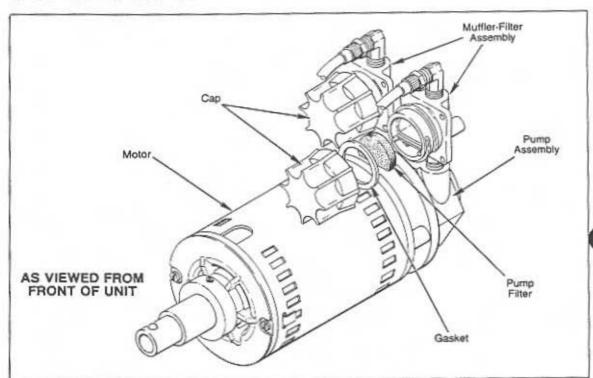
LOCATION OF FILTERS ON MOTOR/PUMP ASSEMBLY
